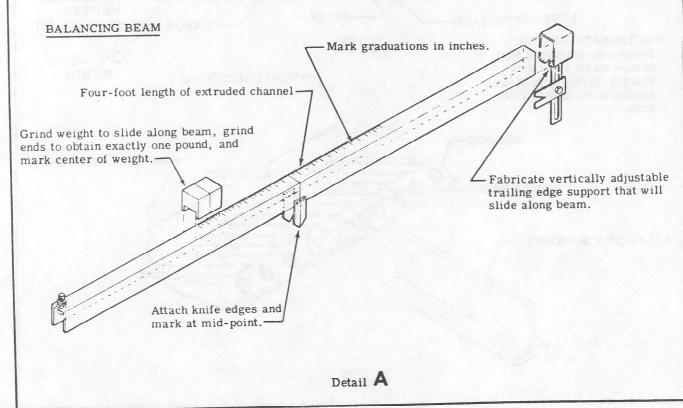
Control Surface Balancing (Sheet 2 of 5)
